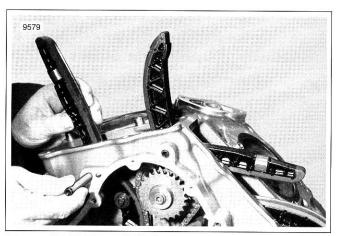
Front Cylinder Fixed Cam Chain Tensioner
